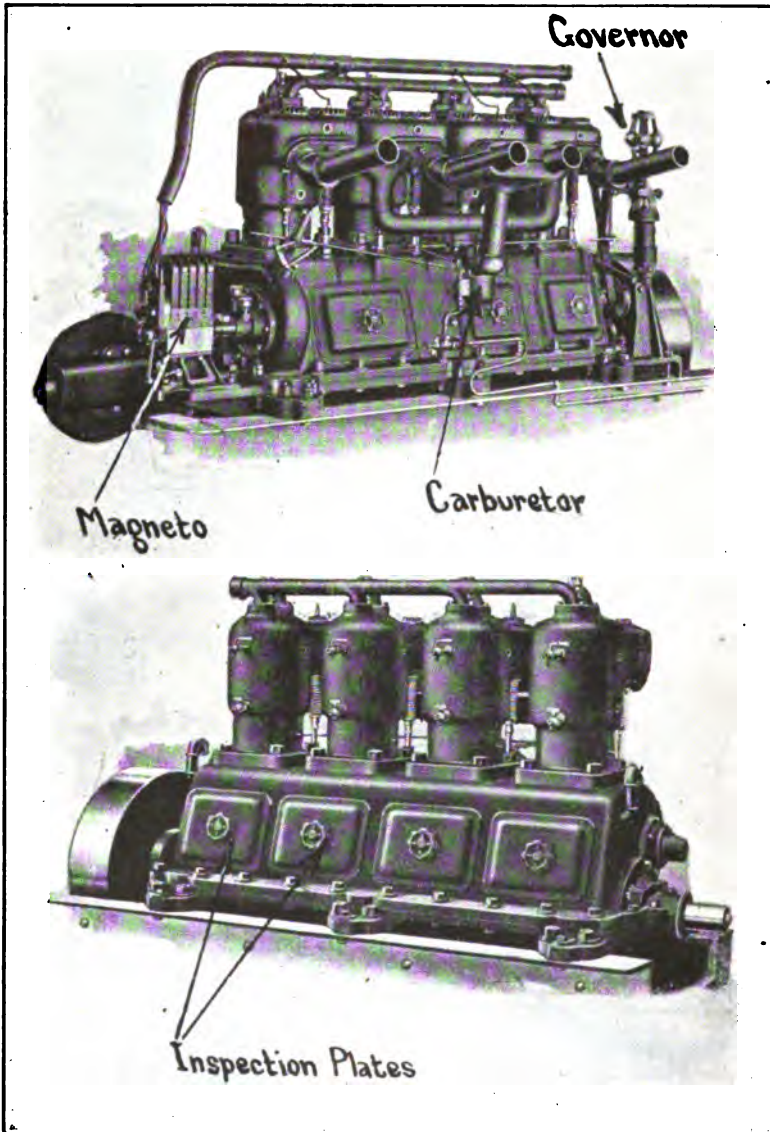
Views of the power plant of "Big Four" gas tractor.
